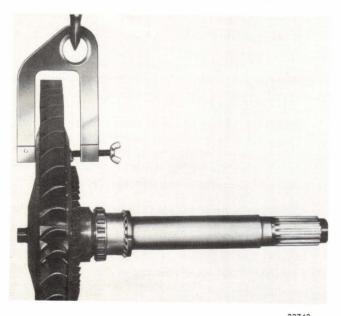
Lifting the Turbine Rotor with Yoke No. 2973
